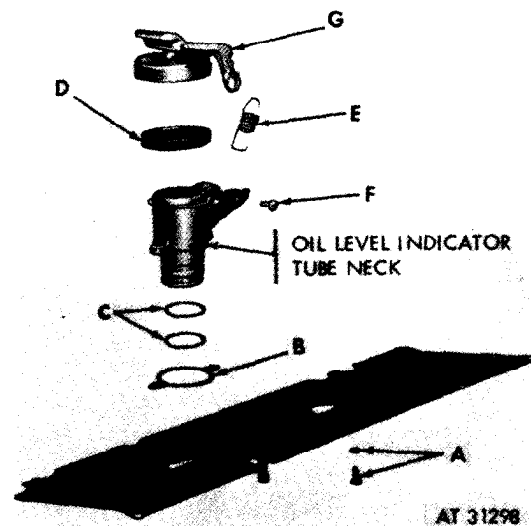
Disassembling or assembling oil filler and oil level indicator tubes (improved oil filler indicator tubes with splash pan drain).
